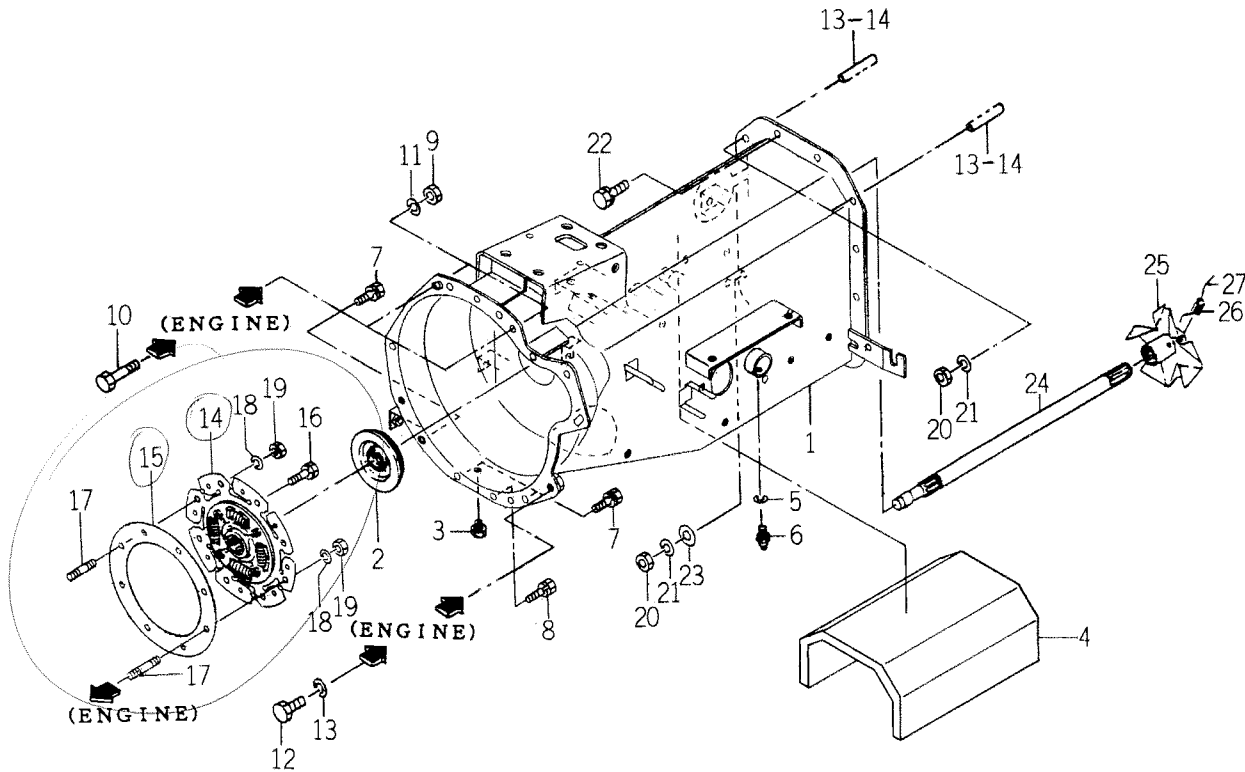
CLUTCH HOUSING SYSTEM (H TYPE)
